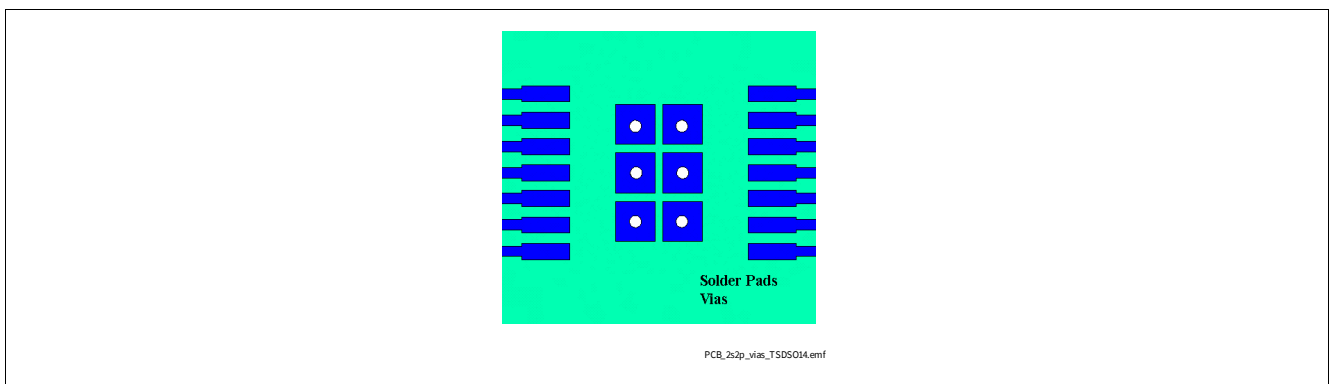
Thermal vias on PCB for 2s2p PCB setup
